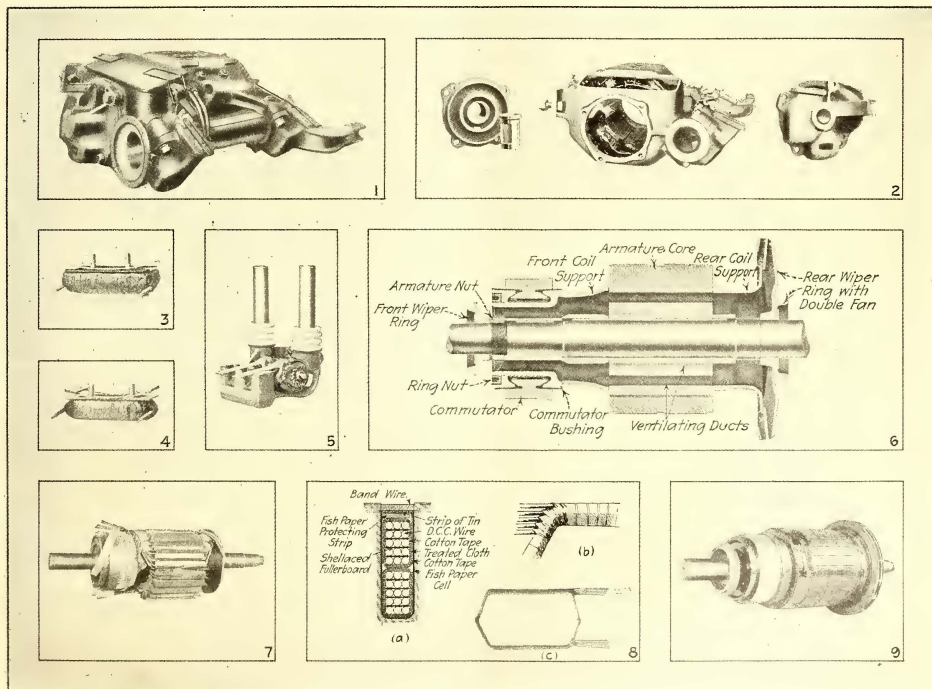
A typical 50-hp., 600-volt box-frame commutating pole railway motor. Fig. 2—Motor frame complete with armature bearing housing removed. Fig. 3—Main field coil and pole. Fig. 4—Commutating coil and pole. Fig. 5—Brushholder. Fig. 6—
